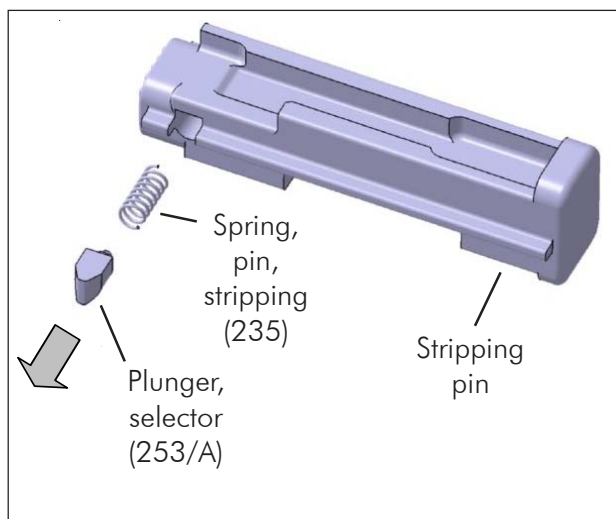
aa - Removal of the plunger, selector (253/A) and the spring, pin, stripping (235)
